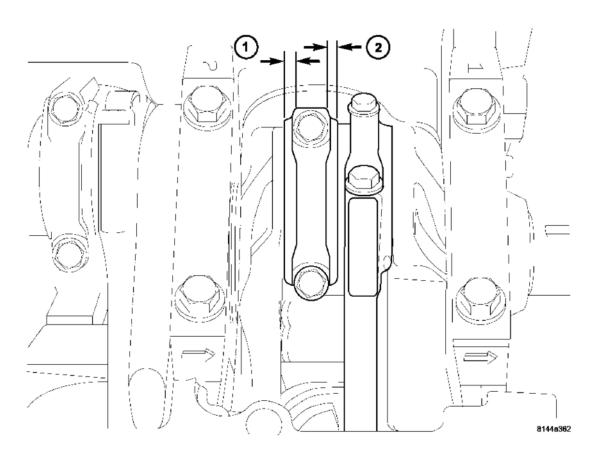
Positioning Connecting Rods Onto Crankshaft And Installing Rod Bearing Caps Courtesy of CHRYSLER LLC
